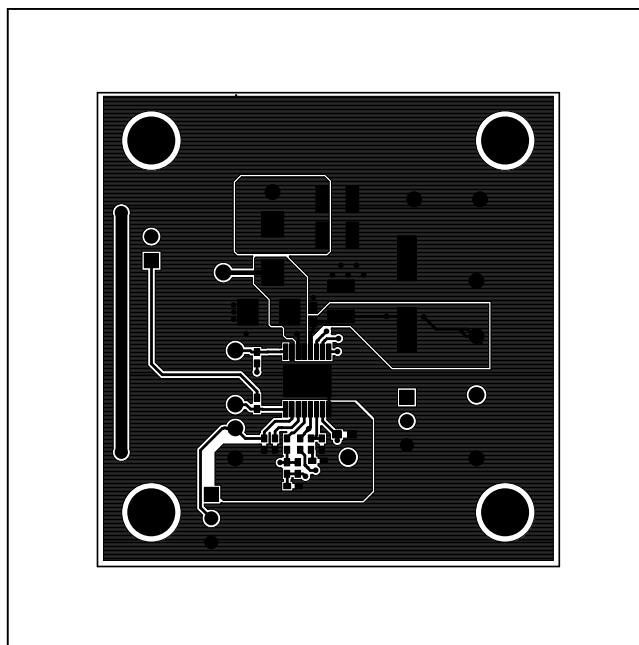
MAX16936 EV Kit PCB Layout—Component Side
